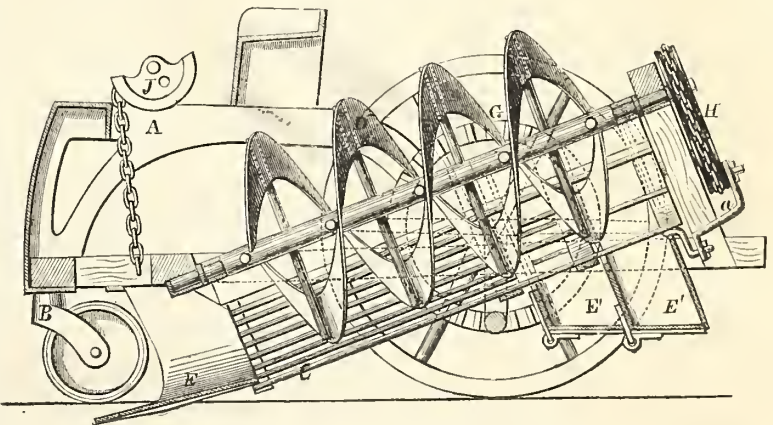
SECTIONAL VIEW OF THE DIGGER.
